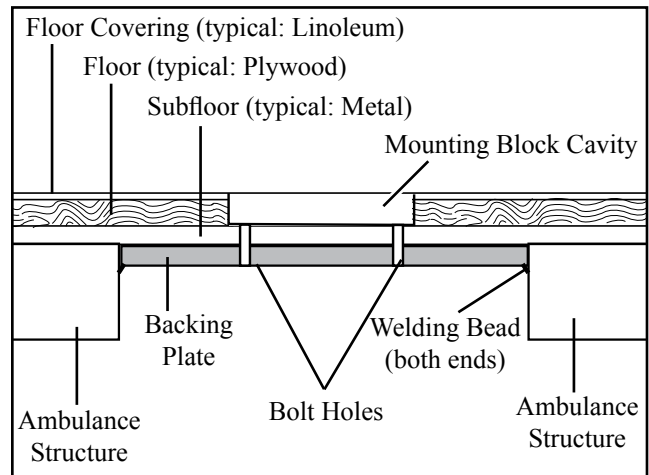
Typical Floor Cross-Section for Cutting the Mounting Block Cavities
